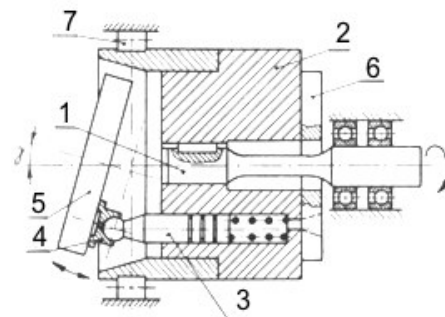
General scheme of axial multi-piston pump: 1 – shaft, 2 – rotor, 3 – piston, 4 – piston shoe, 5 – swash plate, 6 – valve plate, 7 – bearing (Stryczek 1995)
